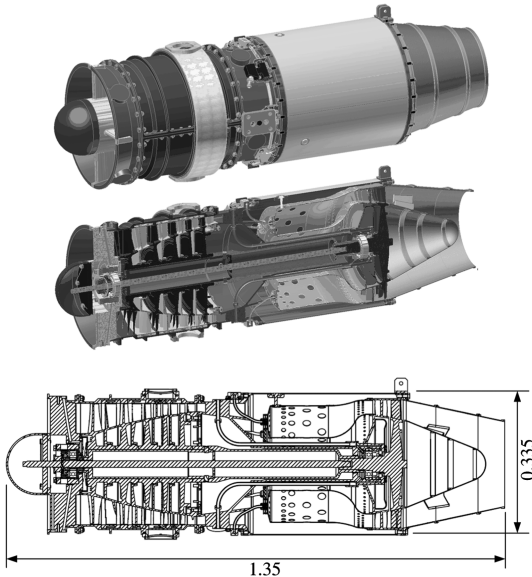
Cross-section view of the studied single spool gas turbine. Dimensions are in meters.
